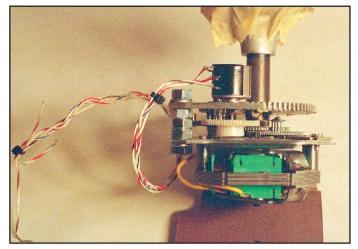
Potentiometer mounting details. Make sure the gears mesh properly, the potentiometer shaft turns freely and the shaft doesn't hit the potentiometer mechanical stops before the rotator shaft stops.
